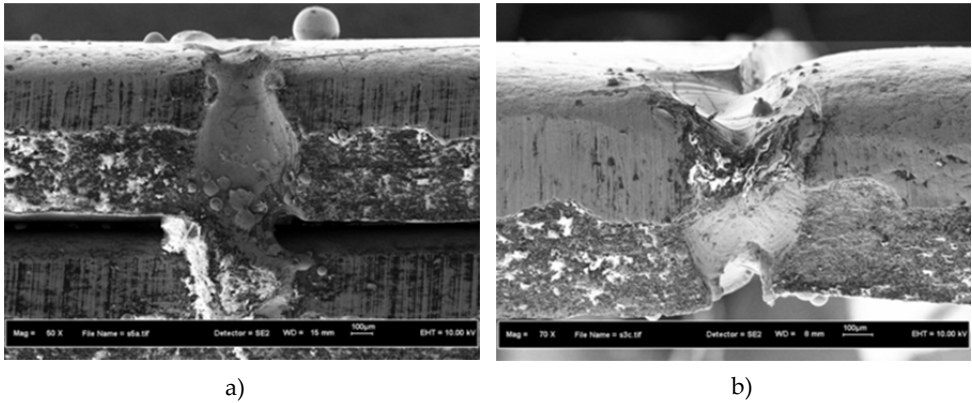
FESEM micrographs of a stainless steel 304 spot weld joint; (a) butt joint and (b) lap joint, produced by 3.5 kW laser beam peak power and 6.5 ms laser pulse duration.
